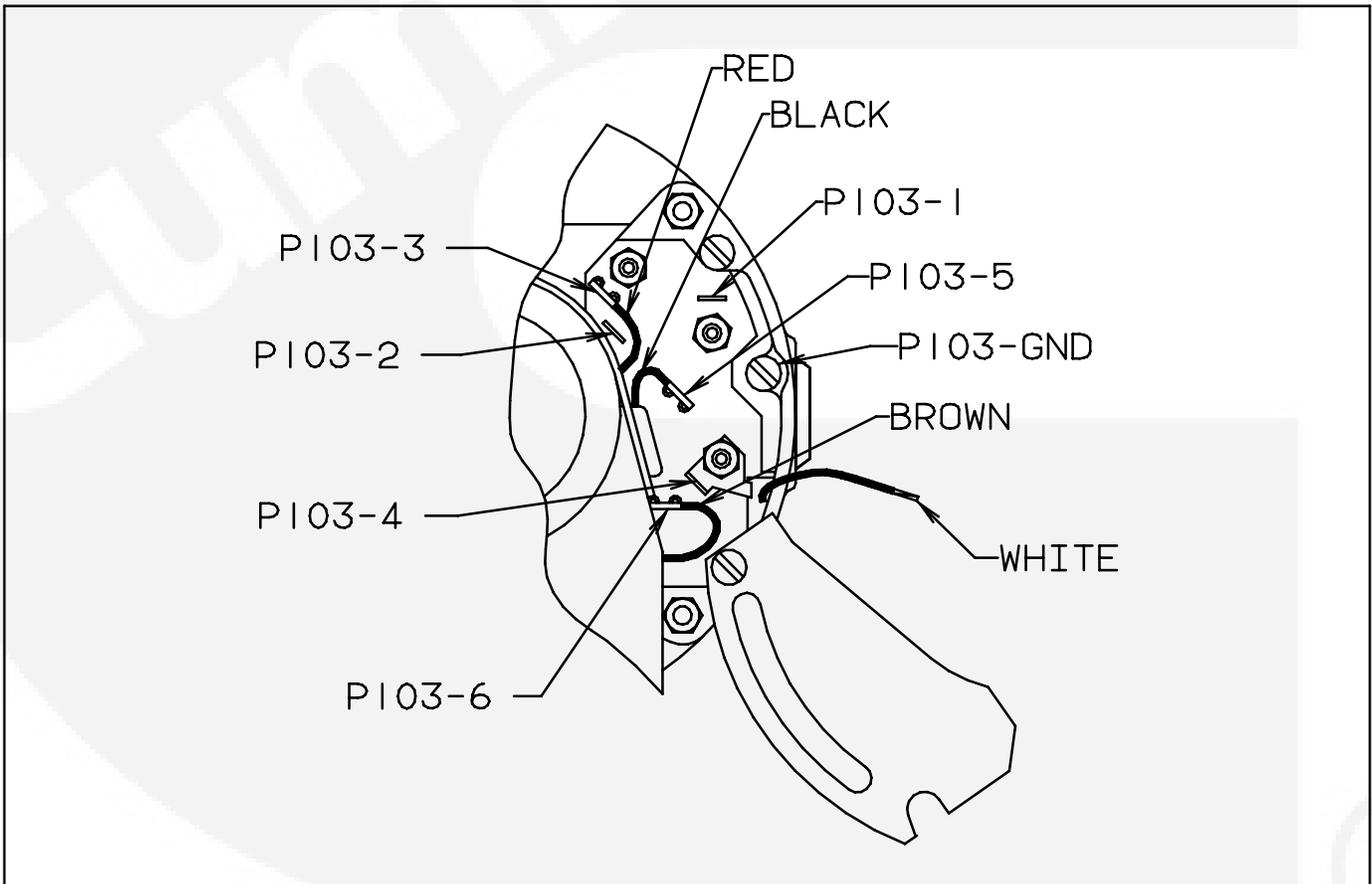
FUEL TRANSFER PUMP MOTOR CONNECTIONS
